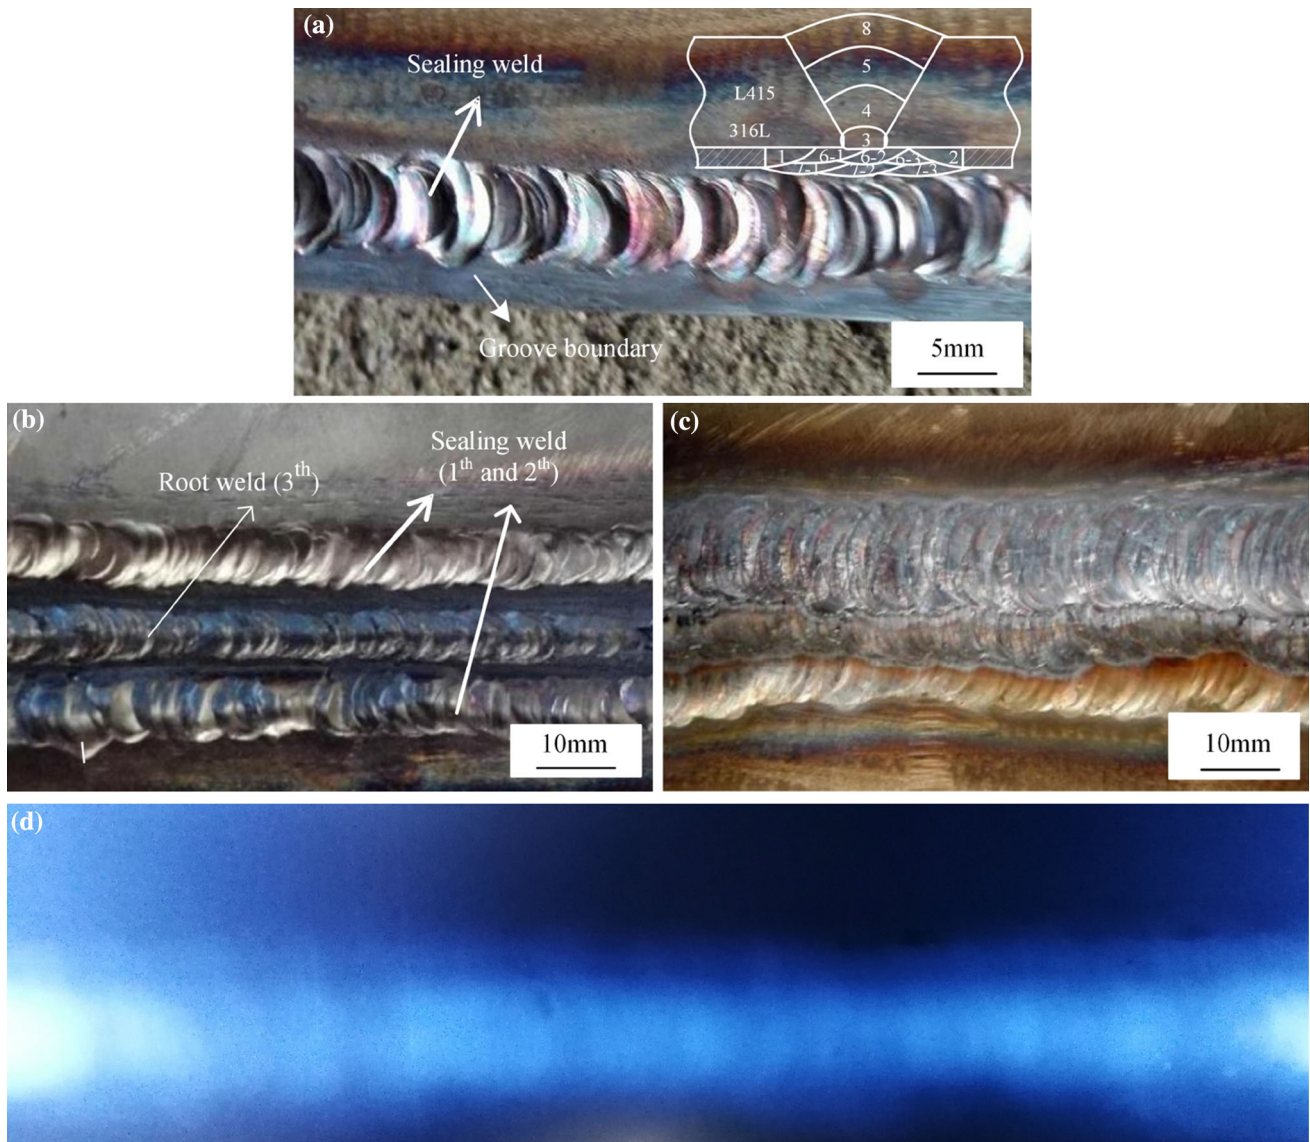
Results of groove D macroscopic morphology of sealing weld a before and b after weldment group; c macroscopic morphology of 316L layer after welding; d RT result
